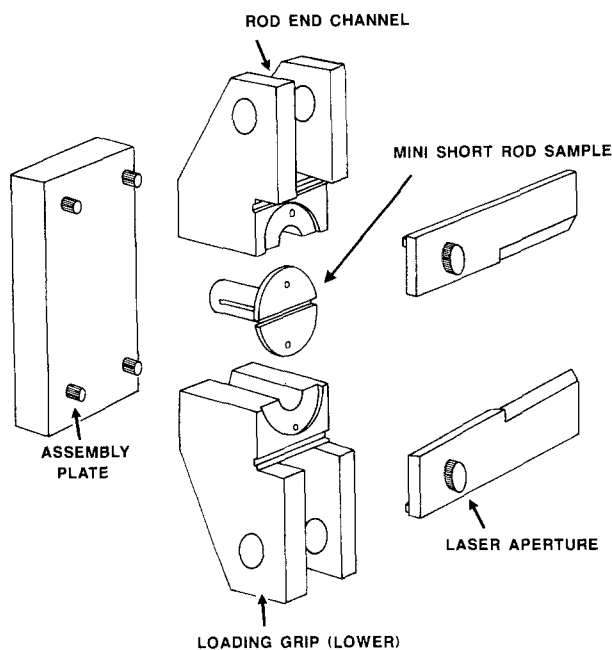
Fracture toughness test specimen loading fixture.
